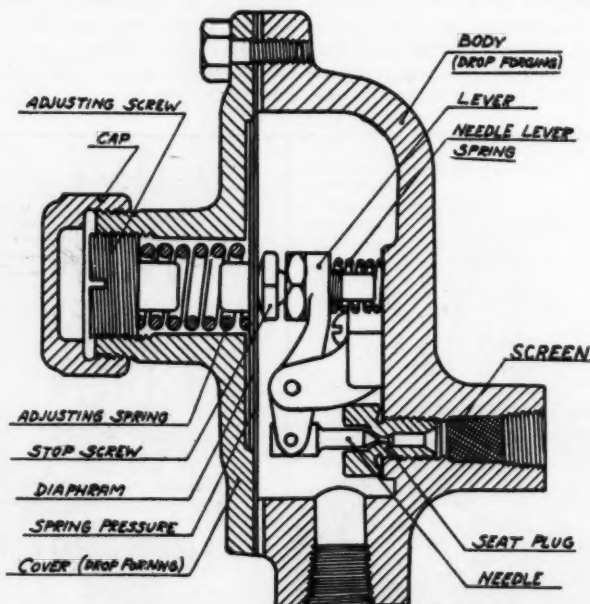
CUTAWAY OF ZEROZONE EXPANSION VALVE
